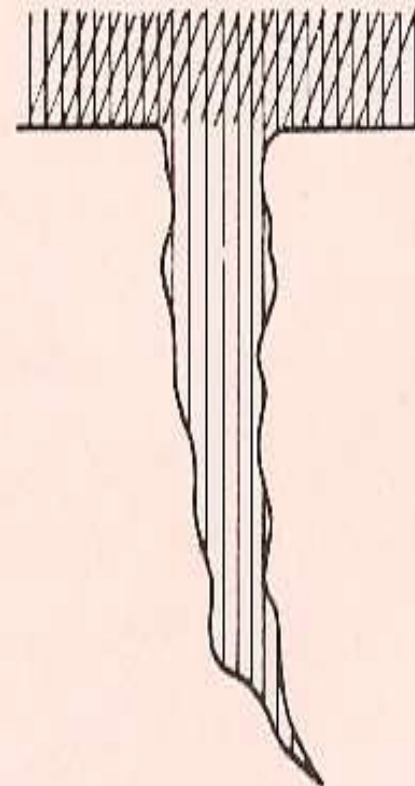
Using penetrant on finished weld.
